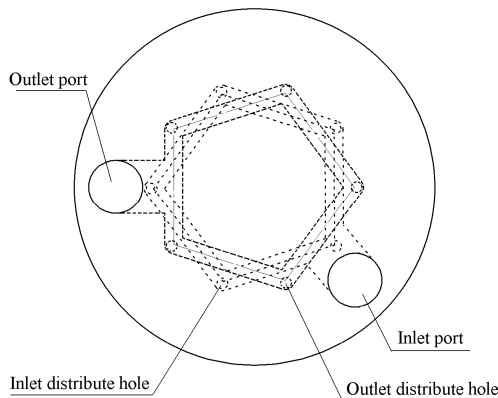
Location of Inlet and Outlet distribute holes on the side plate A and B for the motor
